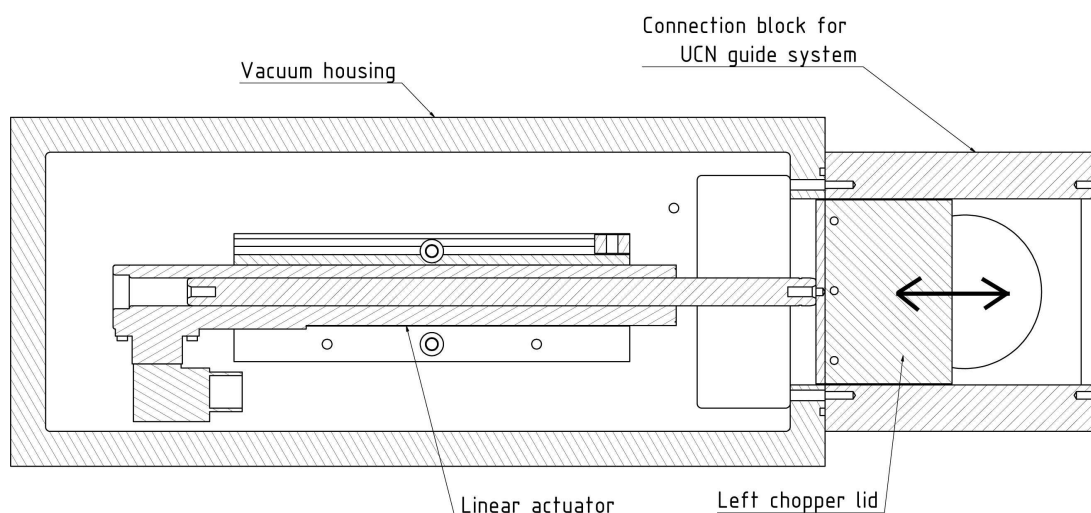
Sectional view of the shutter design. Due to the finite page size, only one motor housing is shown.
